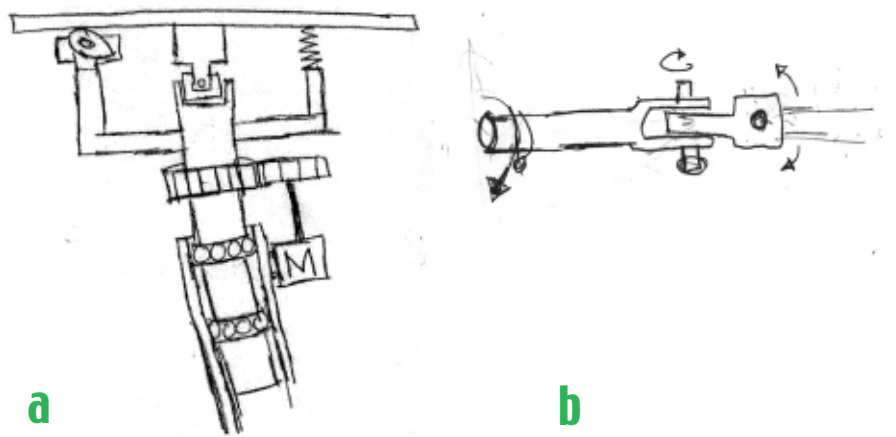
Sketches of (a) preliminary neck design and (b) neck joints (universal joint) [2]
